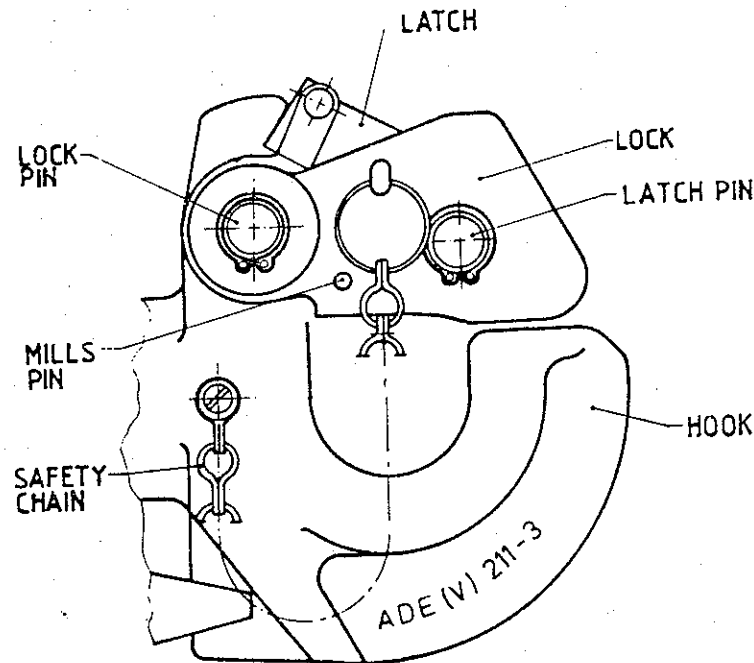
TOWING PINTLE ASSEMBLY - PARTS IDENTIFICATION
